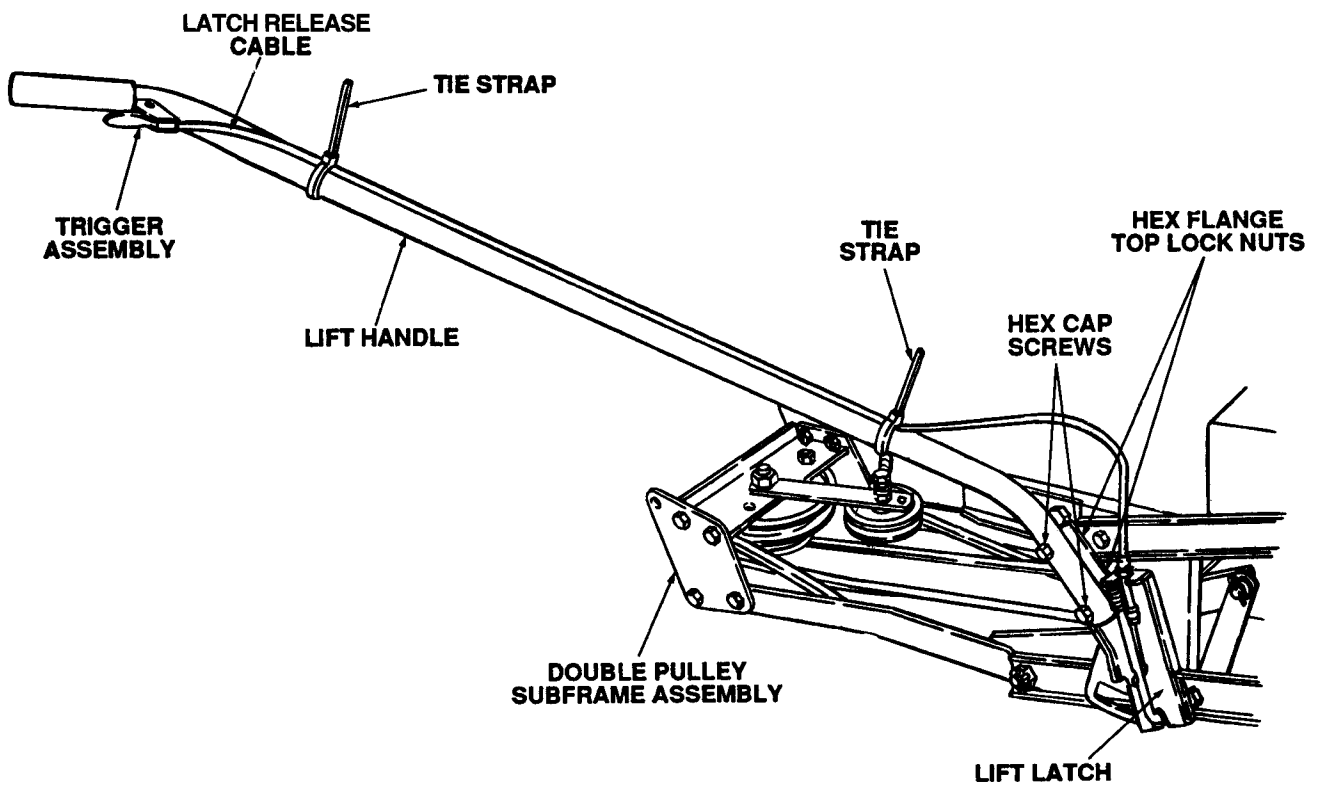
Installing Snow Thrower Lift Handle and Latch Release Cable.
